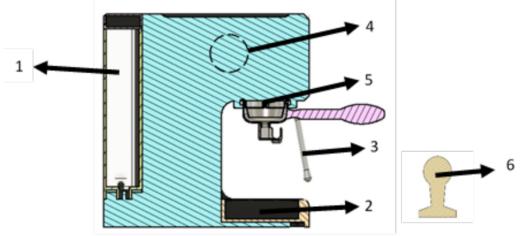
Components of the Ferratti Ferro FCM 3605 Brewing Machine Description of components 1-6 in Table 3.
